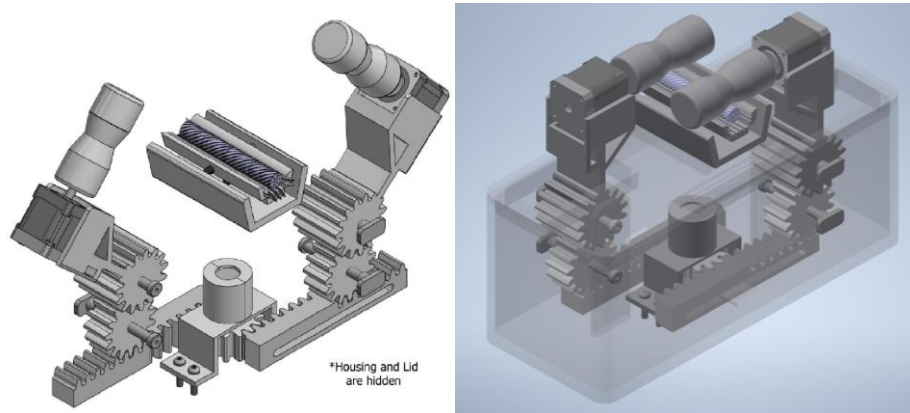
CAD of Line Traversal System and Spring-loaded Blade Clamp Design
